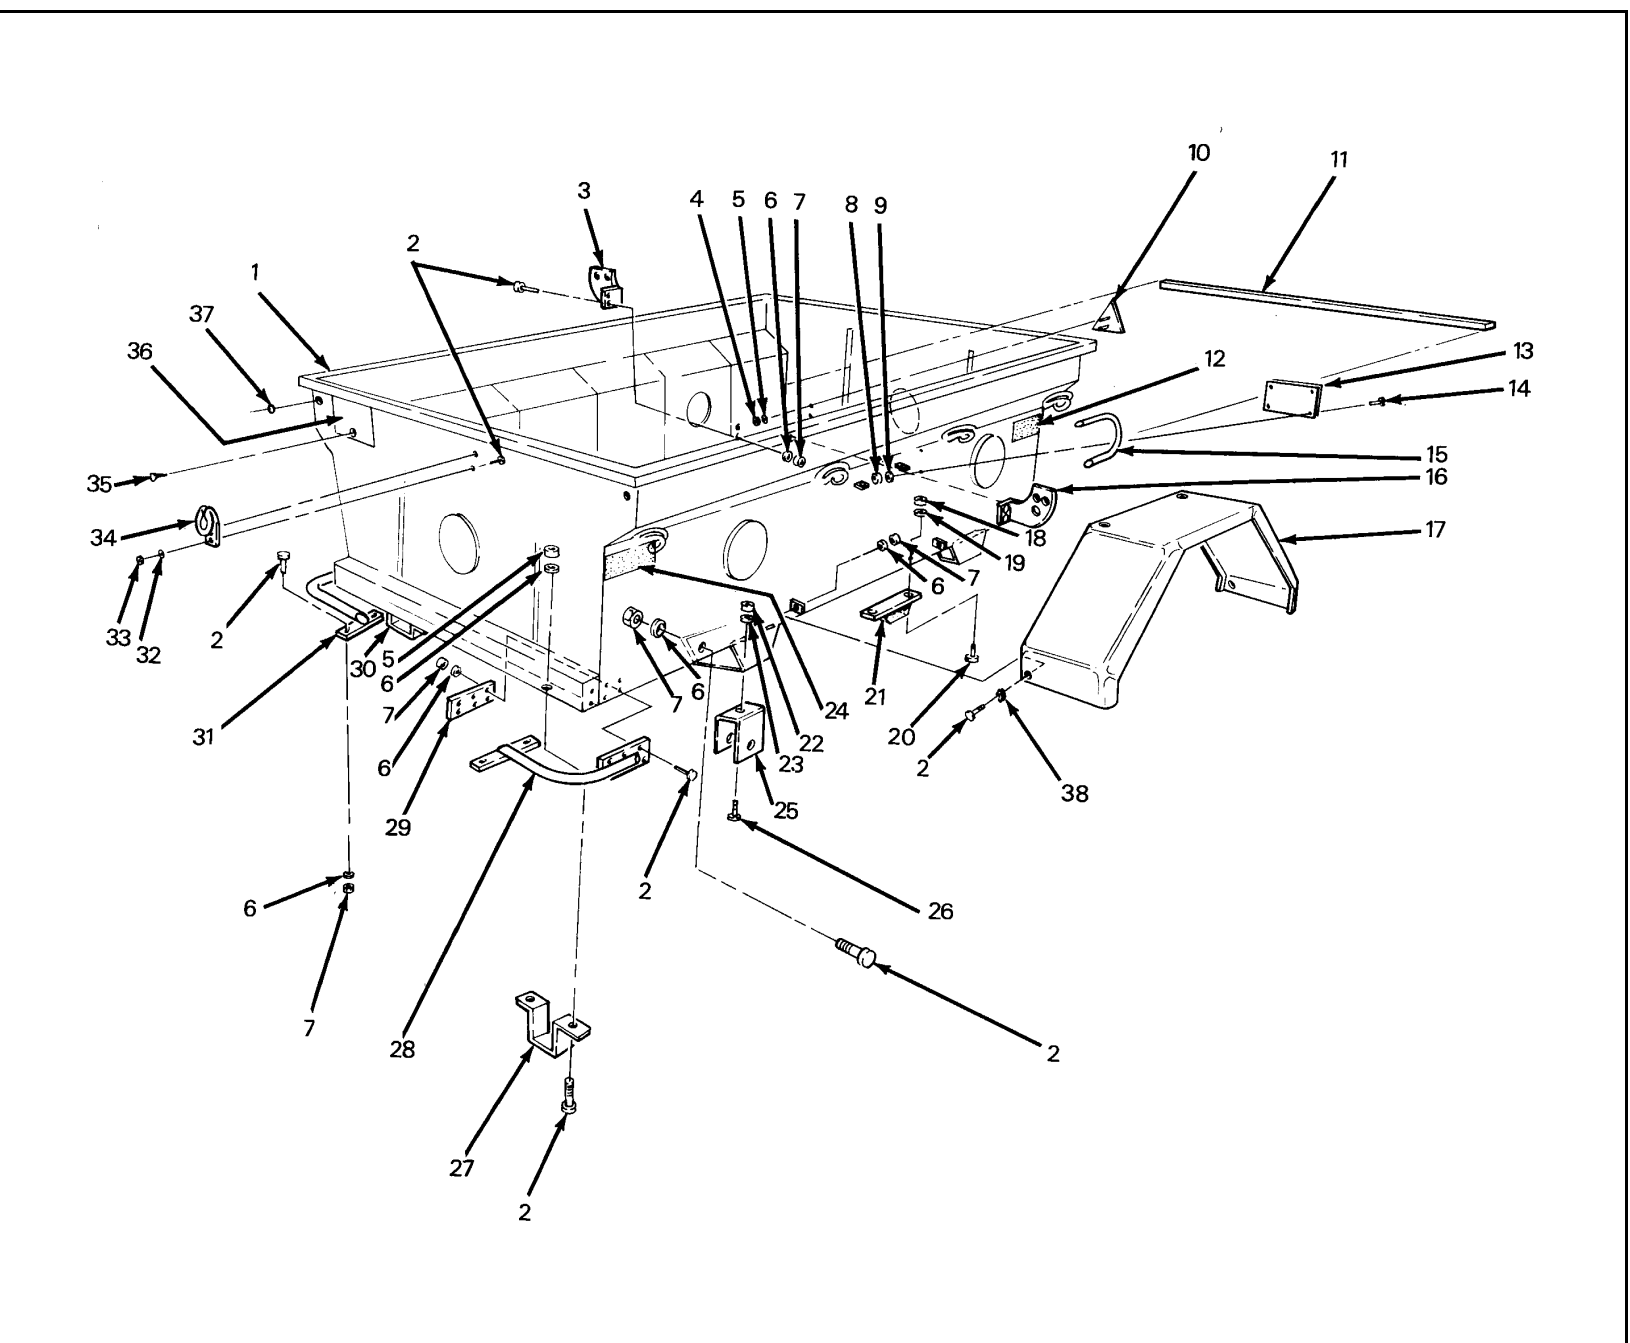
(Sheet 1 of 3) Trailer Body Components
